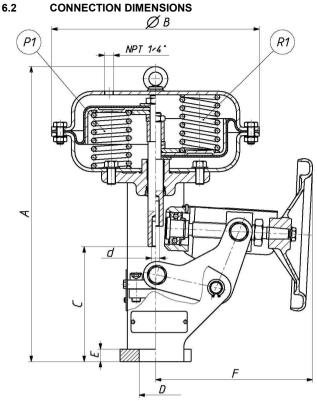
Type P1/R1 pneumatic actuator connection dimensions Table 4. Connection dimensions
